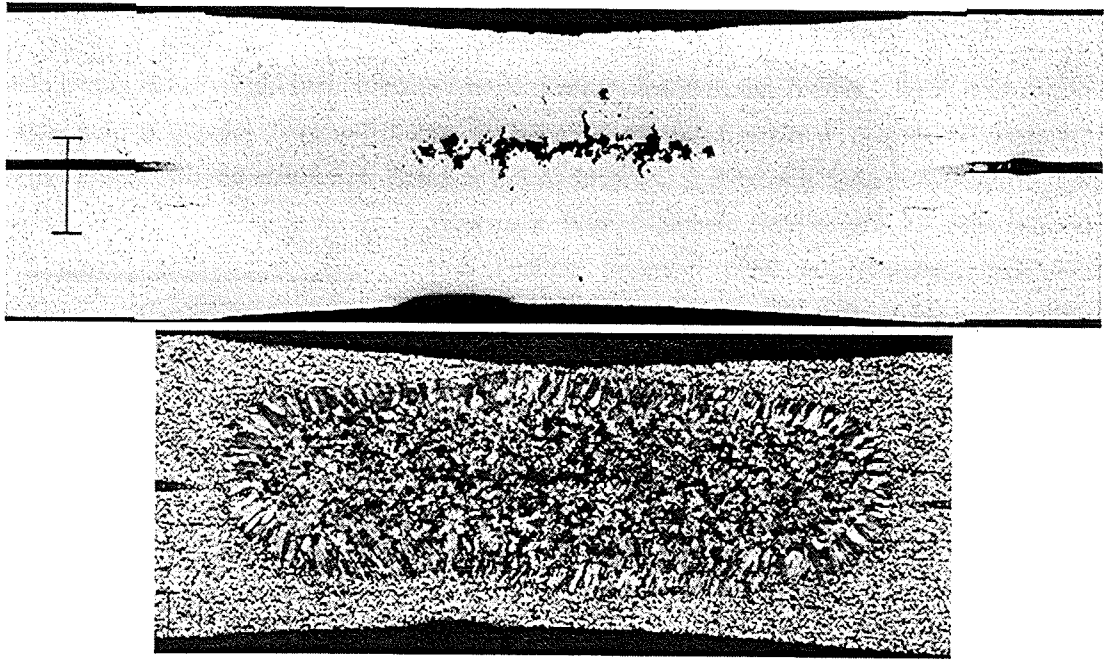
Cross section of a typical region-I weld (5.5 mm weld button diameter).
